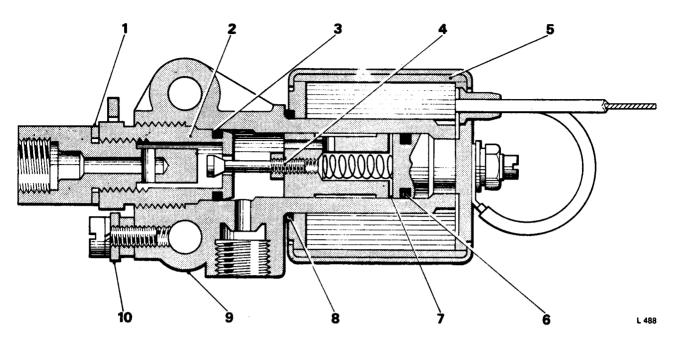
SECTIONAL VIEW OF A SOLENOID VALVE
